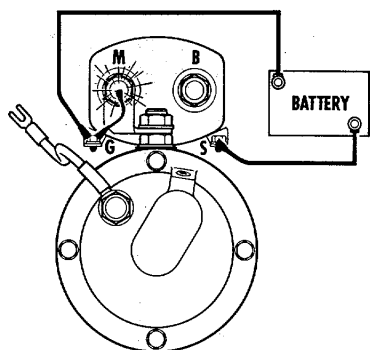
Circuit for checking pinion clearance. (Types shown in Figures 1, 2 and 3.)
